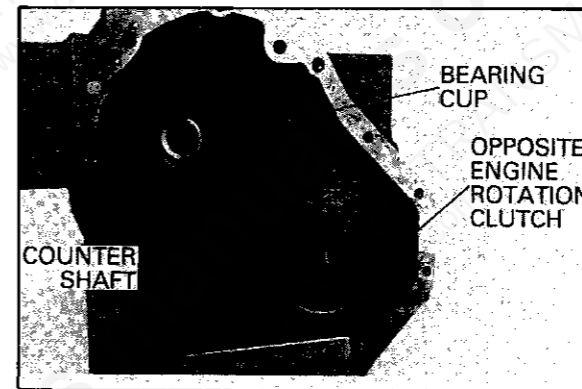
OPPOSITE ENGINE ROTATION CLUTCH INSTALLATION
